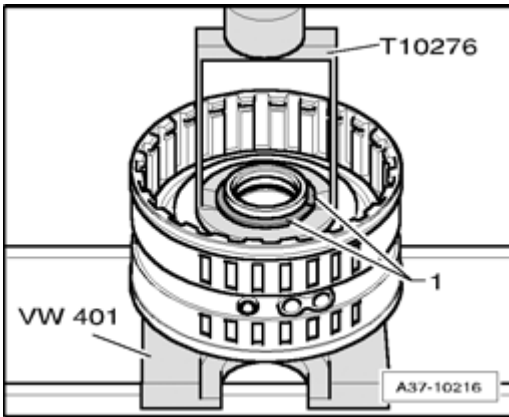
Installation Bracket T10276 And Split Retaining Ring
